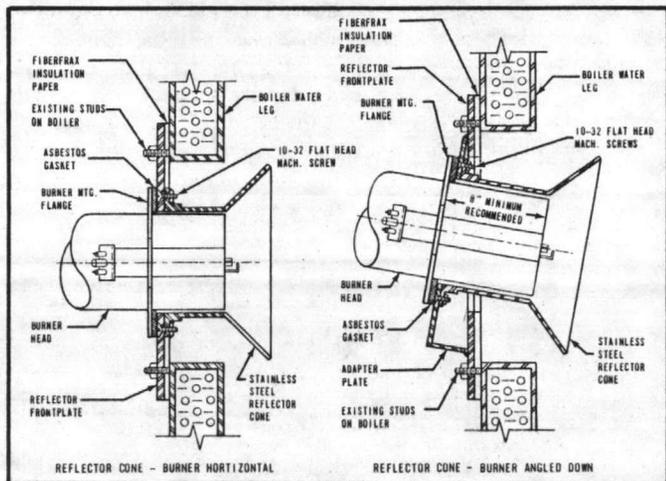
REFLECTOR FRONTPLATE INSTALLATION BOILER WITH SINGLE FIRING DOOR
